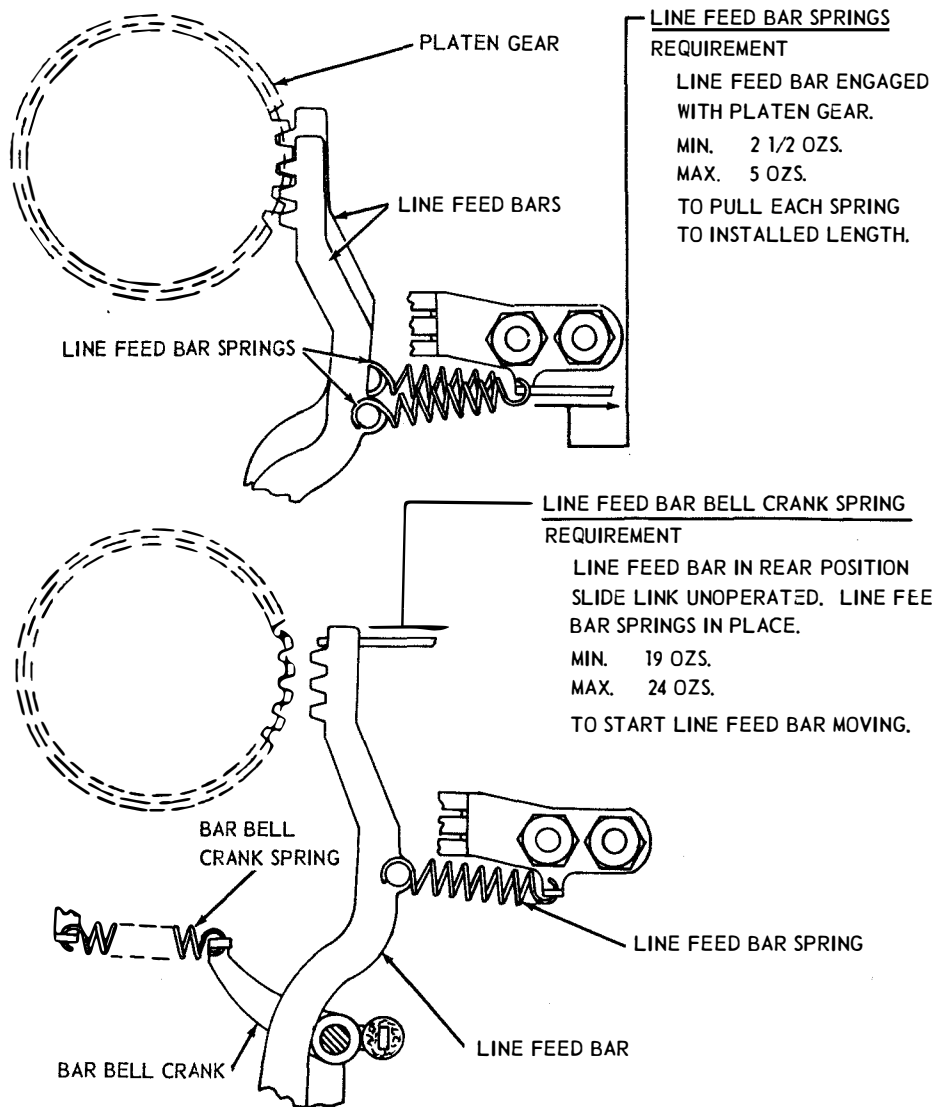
TYPING UNIT, LINE FEED MECHANISM, RIGHT SIDE VIEW
